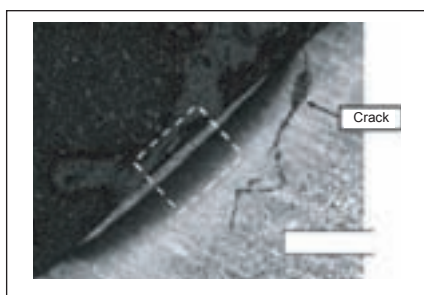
Detailed views of the grinding abuse and crack on the driven side. Etchant 5% Nital.
